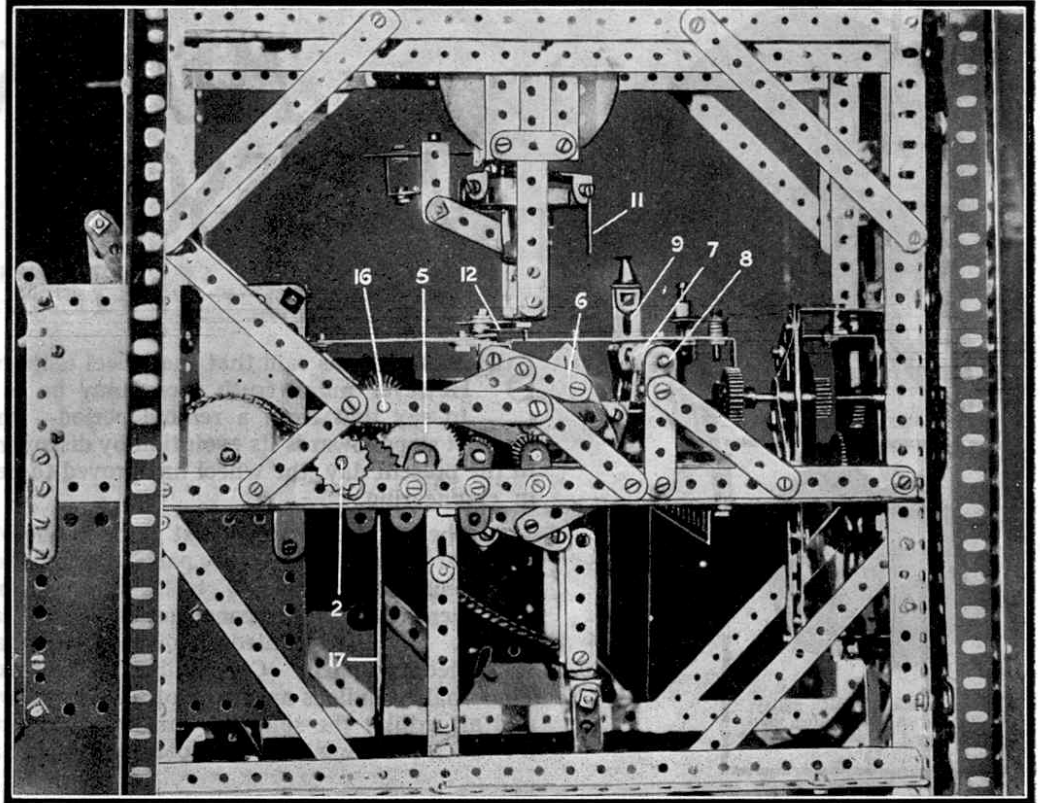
View of the "9 o'clock side" of the mechanism with the three side Motors removed.
